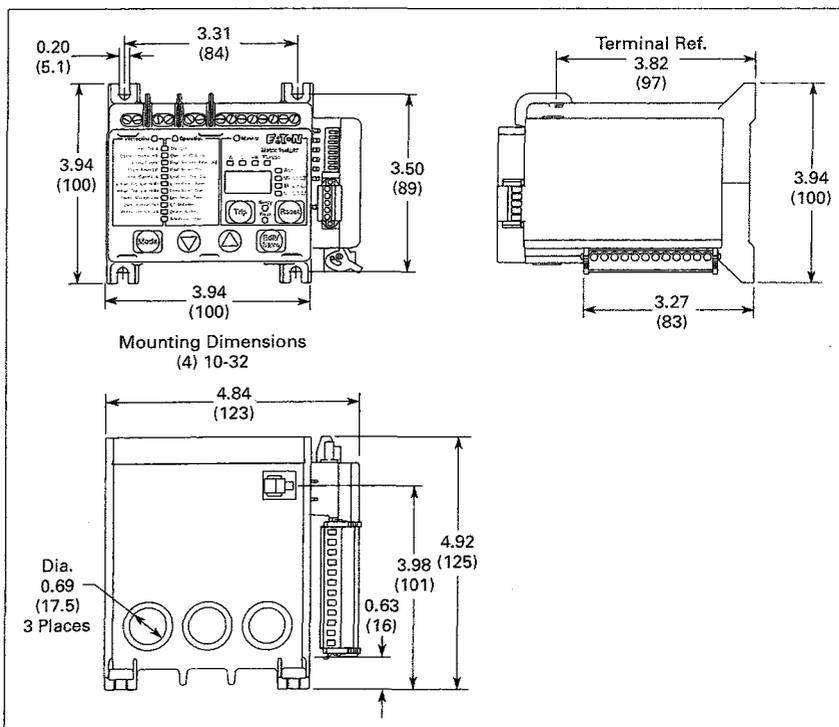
Motor Insight with Mounted DeviceNet or Modbus with I/O Communication Module — Approximate Dimensions in Inches (mm)
